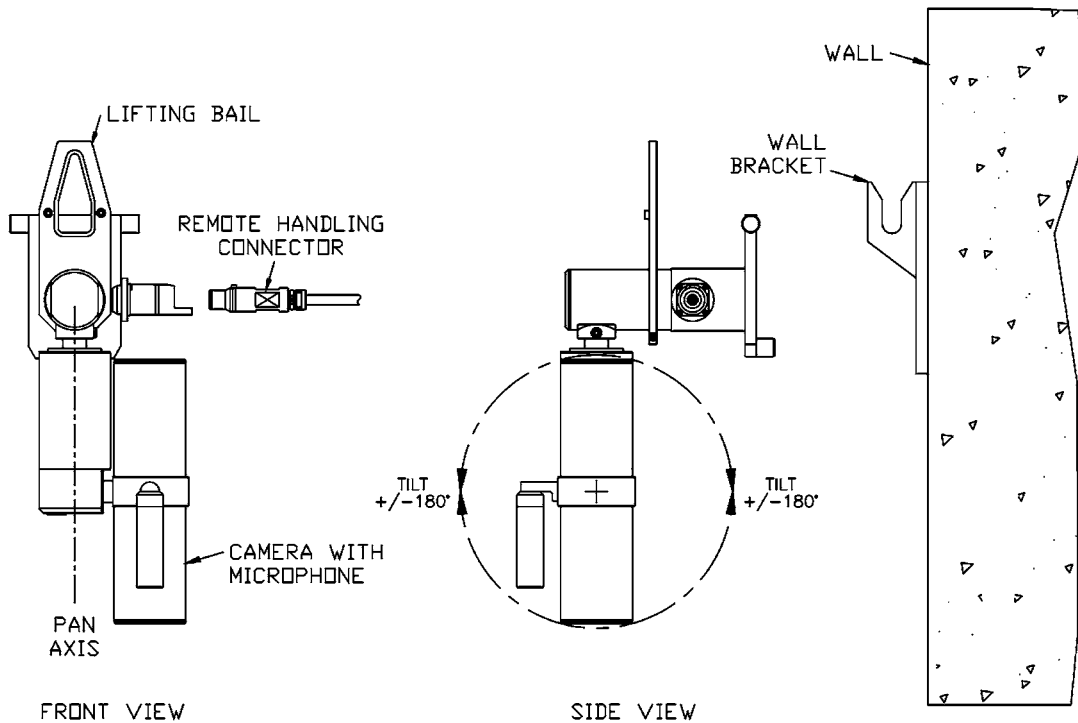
Wall-Mount Camera Configured for Remote Handling
